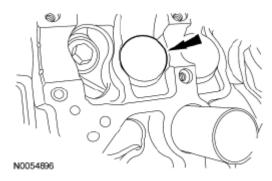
Locating Valve Tappets Courtesy of FORD MOTOR CO.
